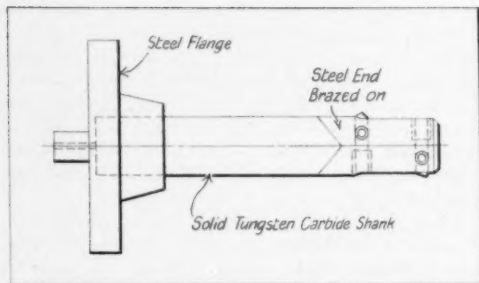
Boring Bar with a Tungsten Carbide Shank Shrunken into Steel Flange. A Steel End-piece, which Carries the Tools and the Adjusting and Clamping Screws, is Brazed to the Shank
